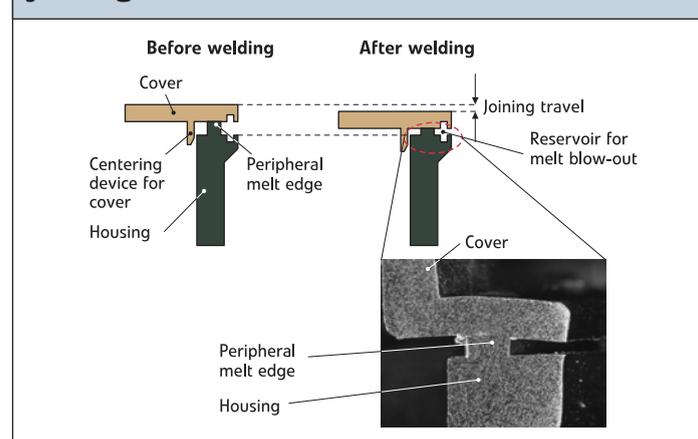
Measurements of the joining distance provide information about melt flow during welding process and thus about the eventual weld [3]
